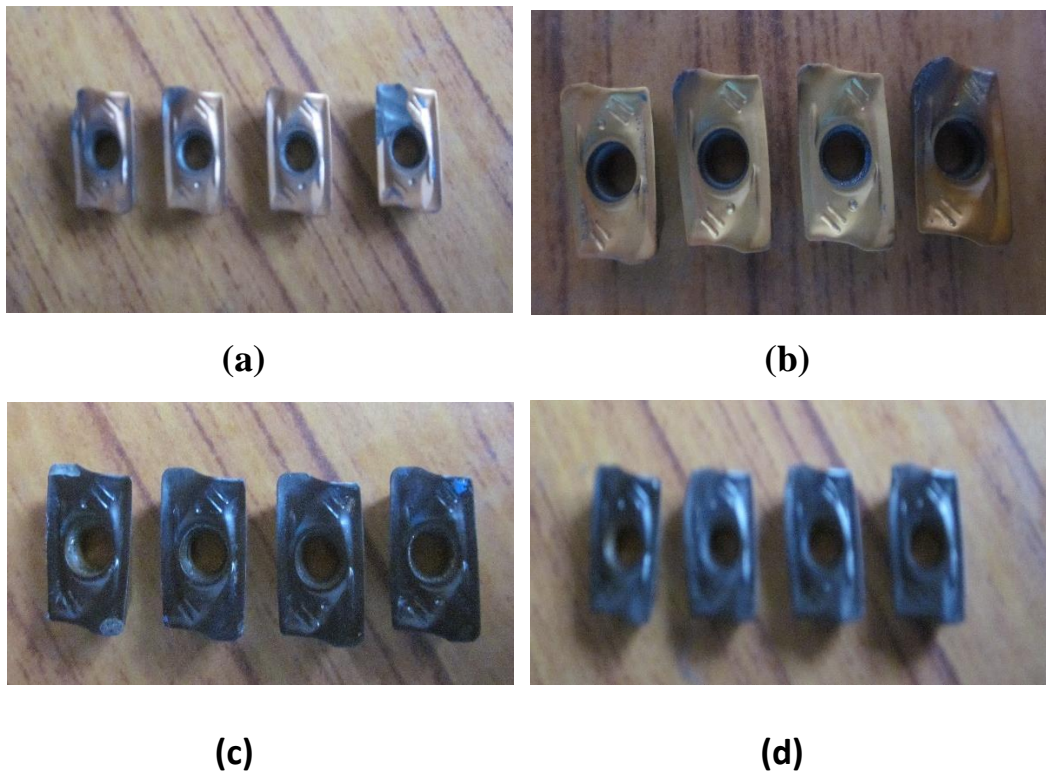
Carbide Inserts (a) PVD tool A (b) PVD tool B (c) CVD tool A (d) CVD tool B
